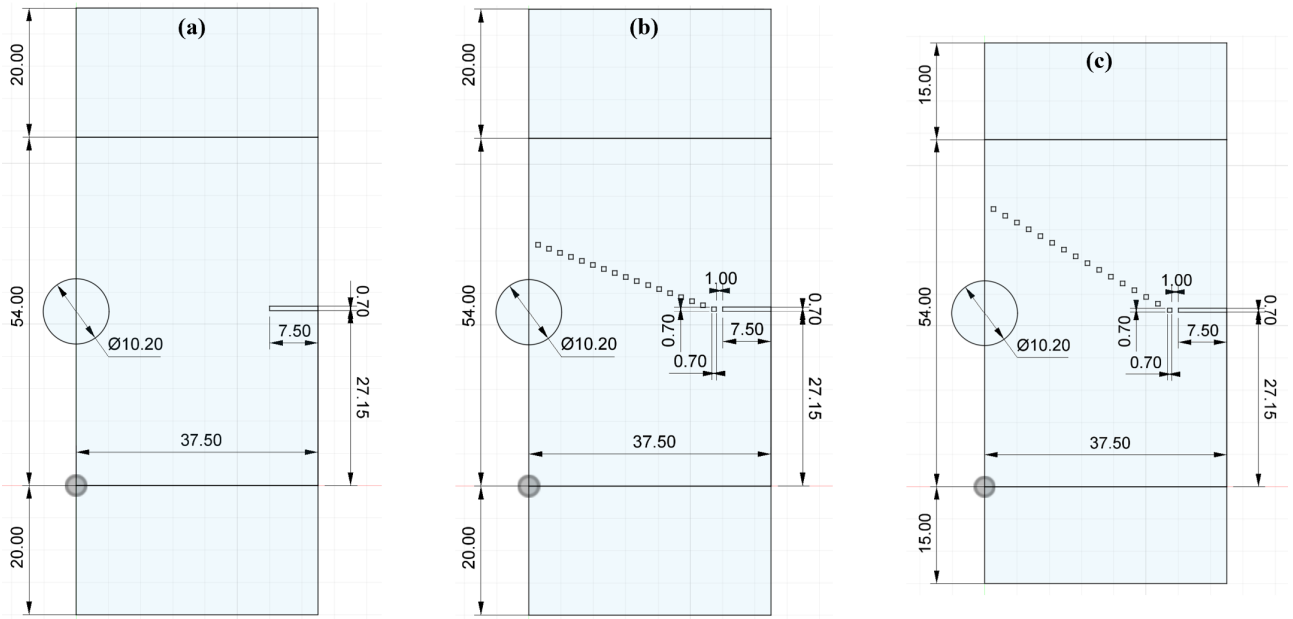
Sample designs. (a) Geometry without pores. (b) Geometry with a line of pores inclined at 20° . (c) Geometry with a line of pores inclined at 30° (with dimensions in millimetres).
